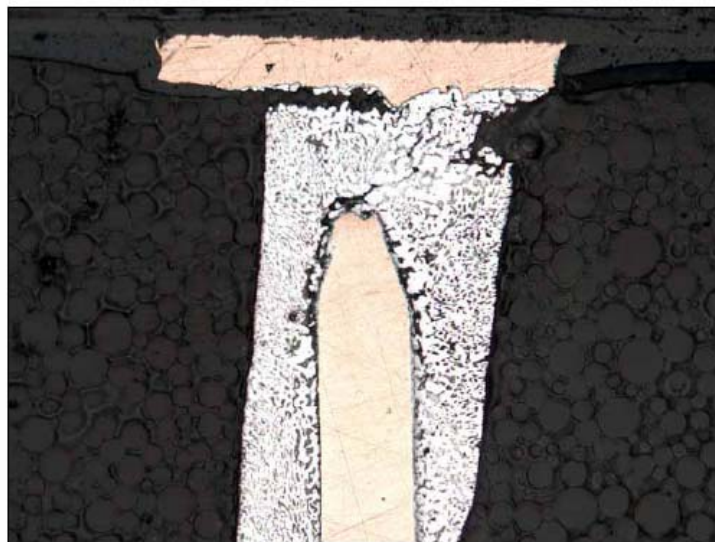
A failed solder joint on the first failed PbSn sample. (100X)
